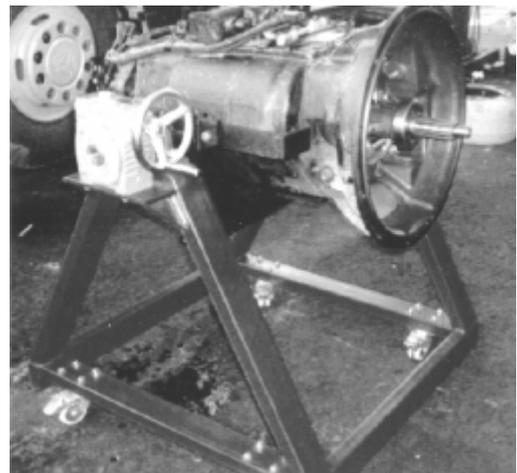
Remove and Install Fast Transmission by Using Special Roll-over Stand of Fast Transmission
